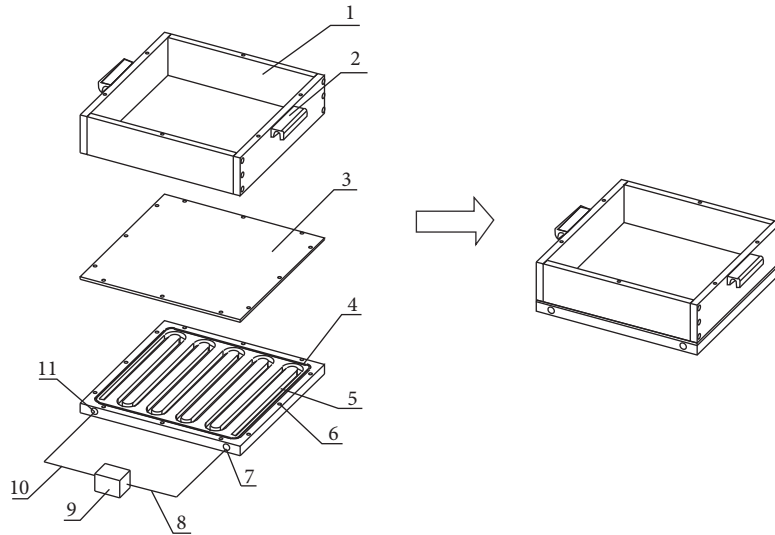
Schematic diagram of test mold for specimen bottom constant temperature controlling; 1: side plate; 2: handle; 3: sealing cover plate; 4: sealing ring; 5: constant temperature water channel; 6: fixed hole; 7: outlet; 8: outlet pipe; 9: thermostat; 10: water inlet pipe; and 11: water inlet.
